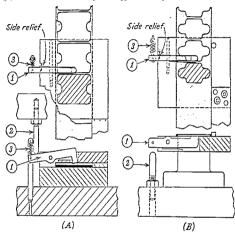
Trigger stops: (A) top stock engagement; (B) bottom stock engagement.
